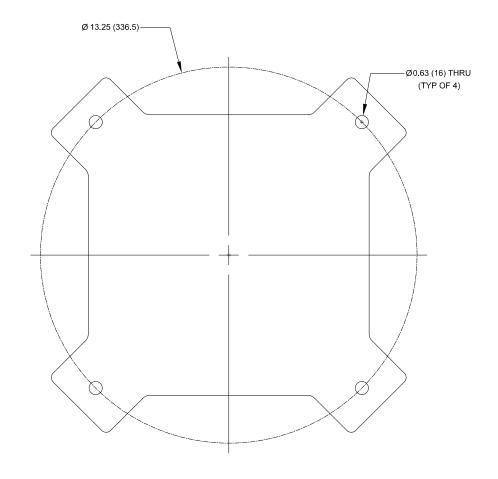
Flashhead Dimensions and Mounting Outline
